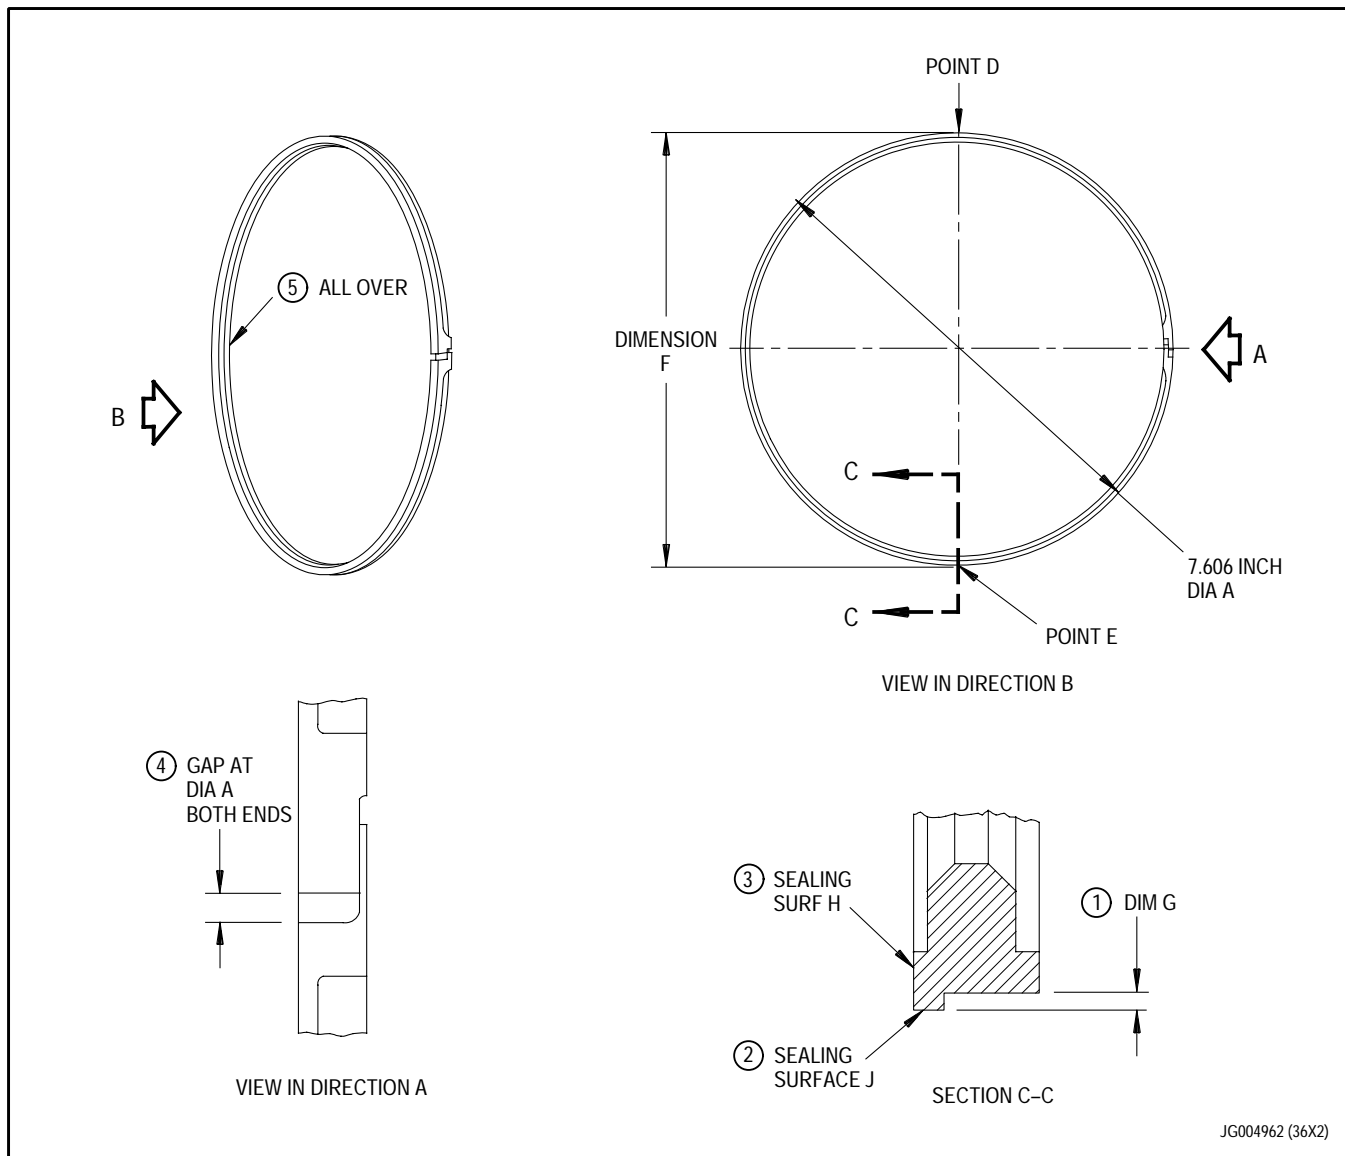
Metal Seal Ring (No. 4 Bearing Seal Sealing Ring) (PN 4002454) - Inspection
